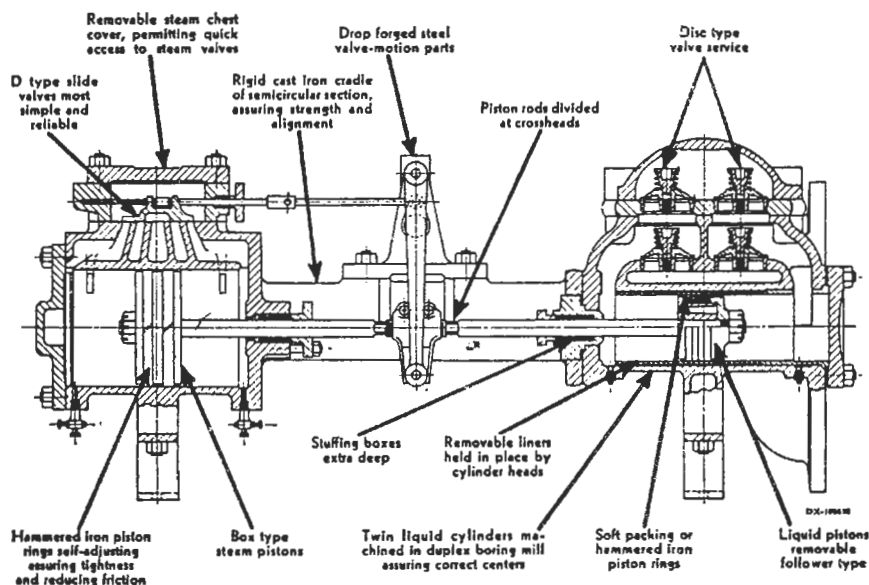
General service duplex steam driven piston pump. (Courtesy Worthington Corp.)
